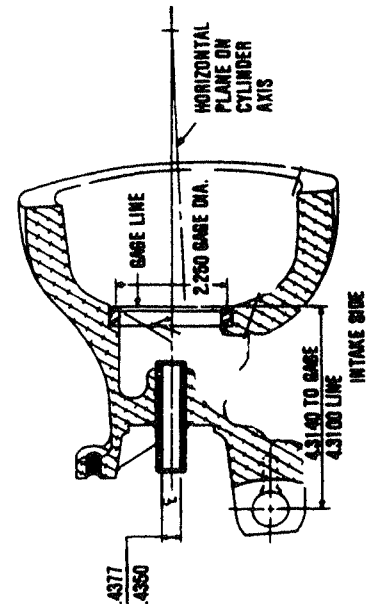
VALVE ROCKER BEARING DIMENSIONS
